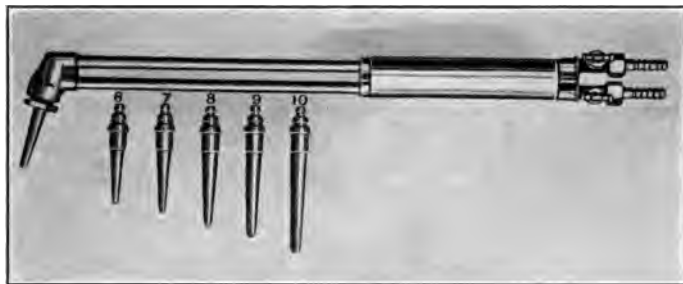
LARGE STYLE C WELDING BLOWPIPE, NO. 146.
